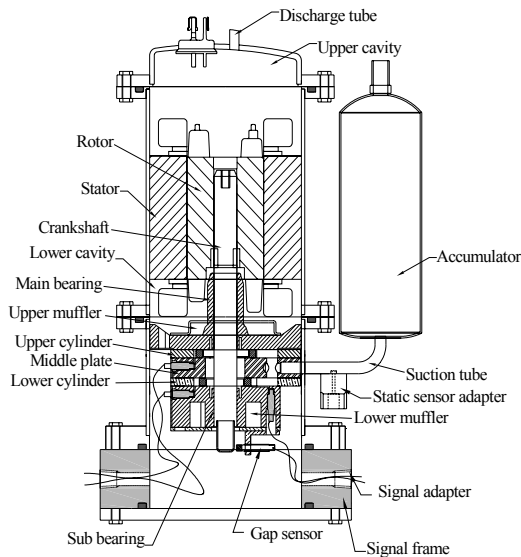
Cross-sectional view of a single-stage twin rotary compressor.
